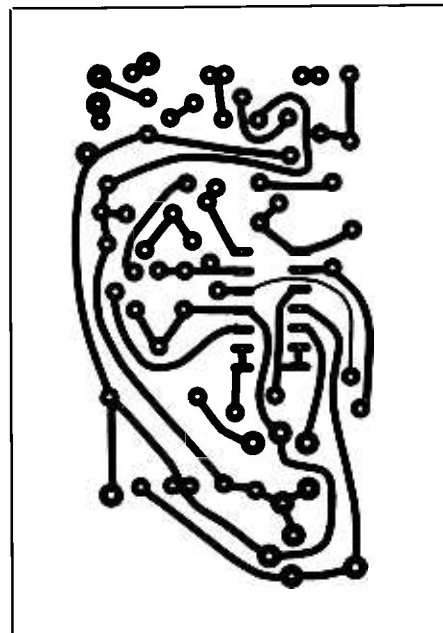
Actual-size etching-and-drilling guide for making printed-circuit board for project.
